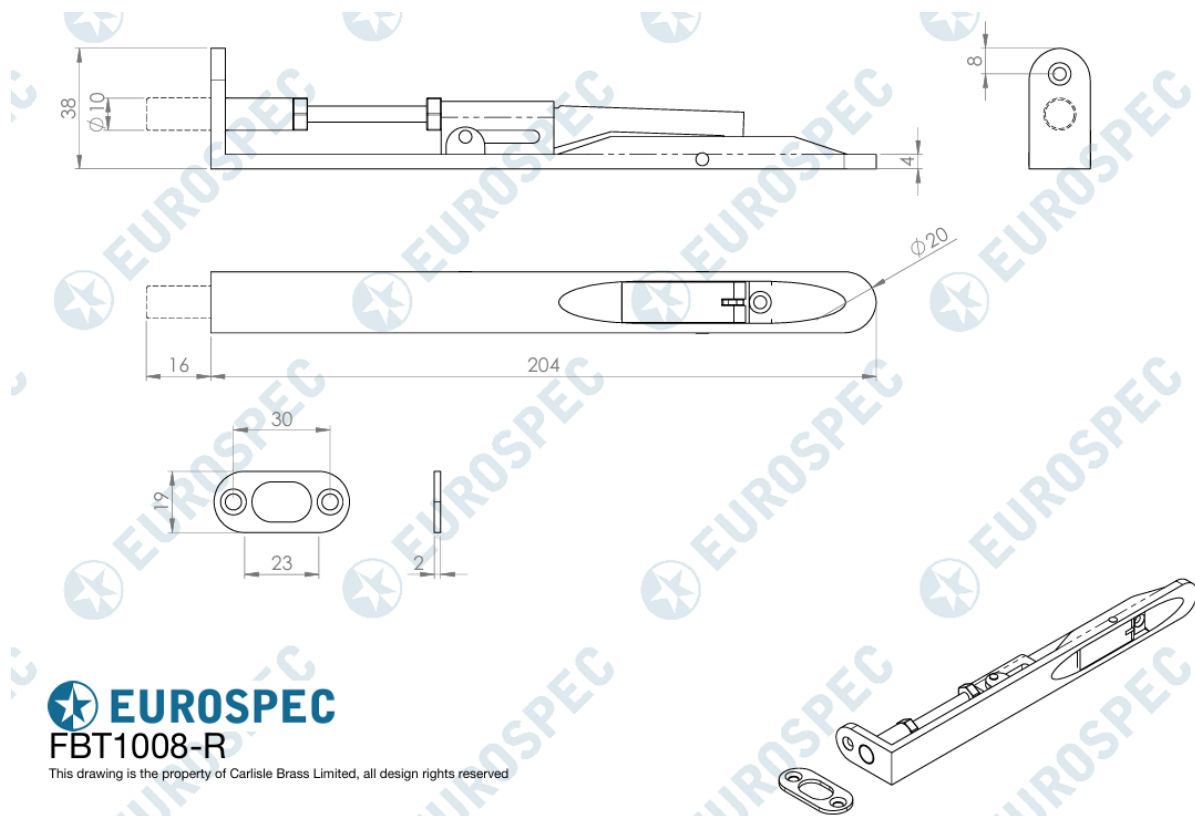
Manufacturer drawing of item 23 Flush Bolt
